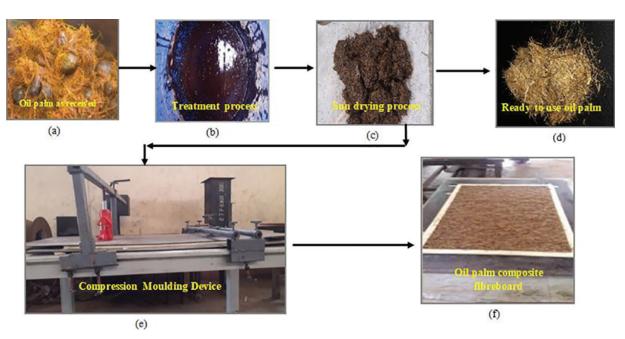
Fabrication process of the oil palm compose fibreboard using hand Lay-Up Compression Moulding.
